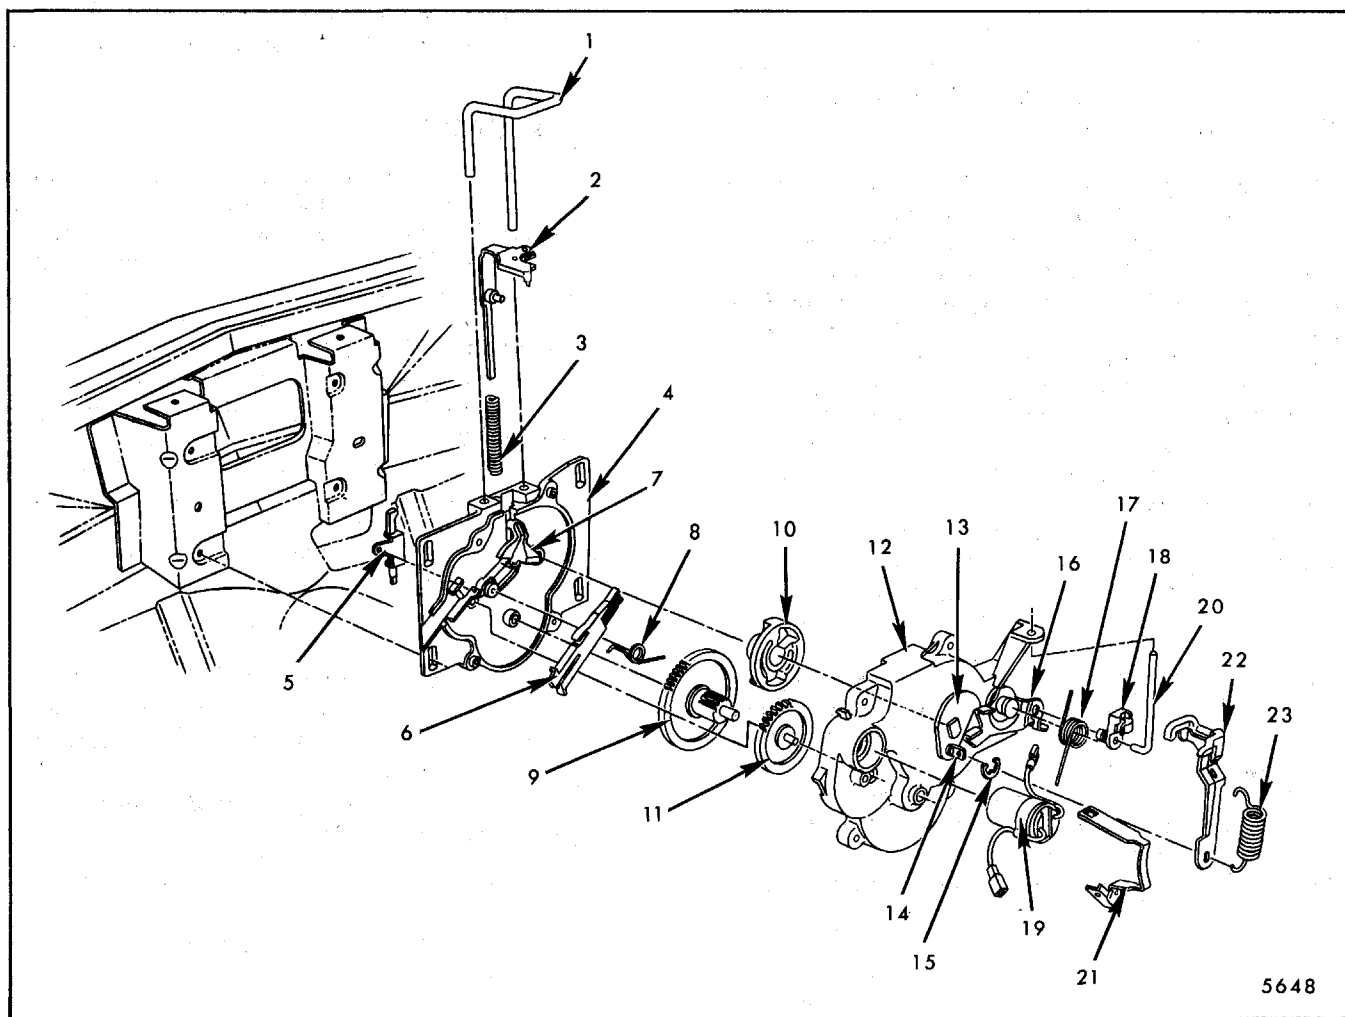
Electric Closing Unit Components - Cadillac "E" Style
